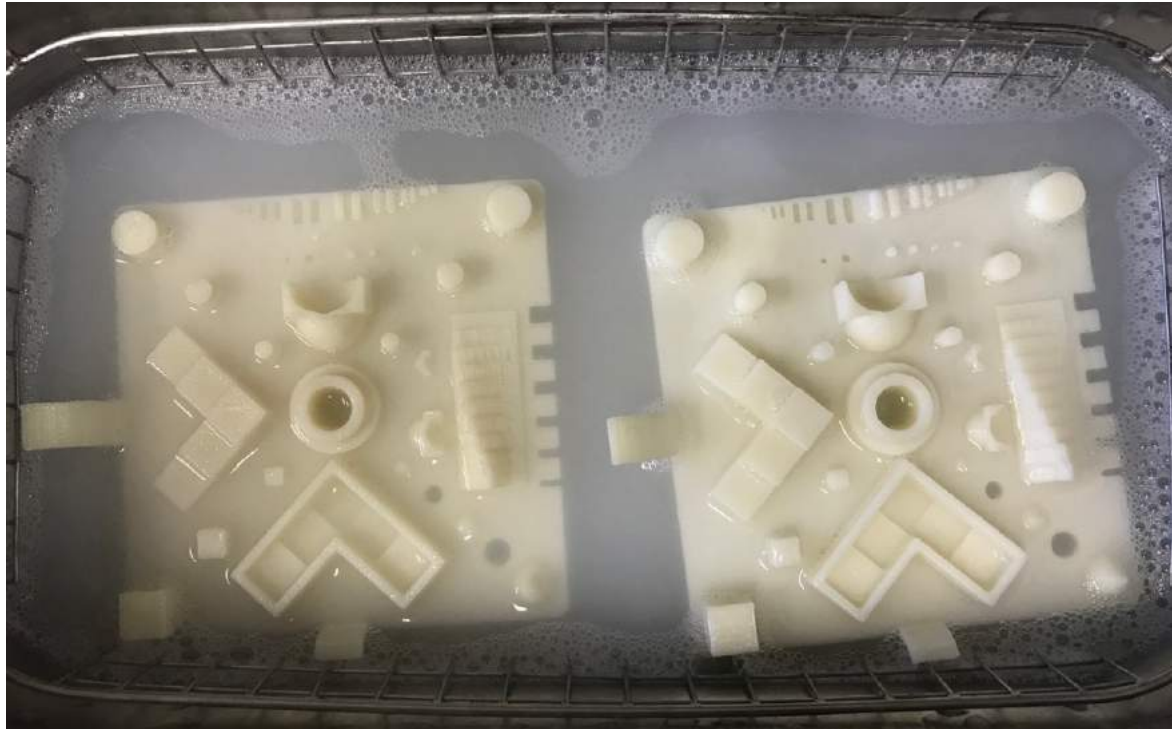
Removal of support material from benchmark parts through the EMAG Emmi-D60
